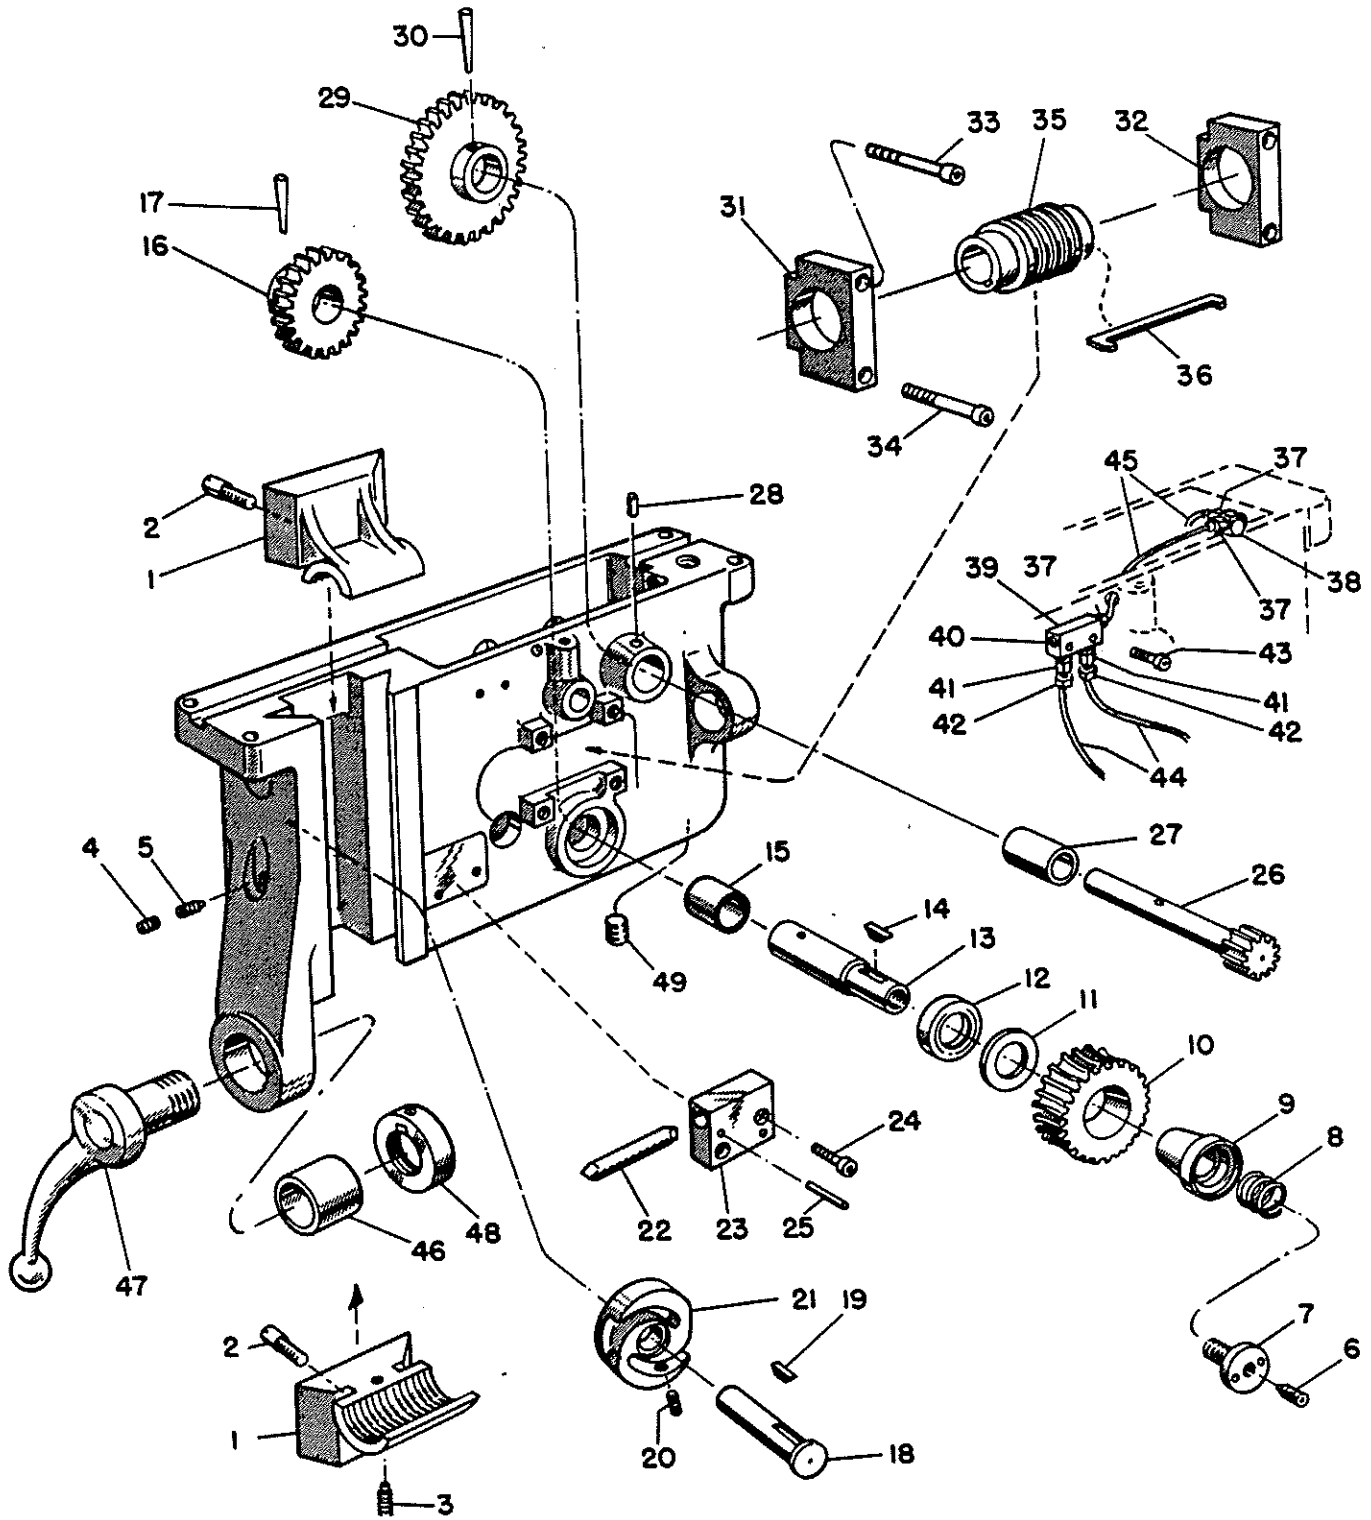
Apron Assembly (Rear) 10'' and 12 1/2''
